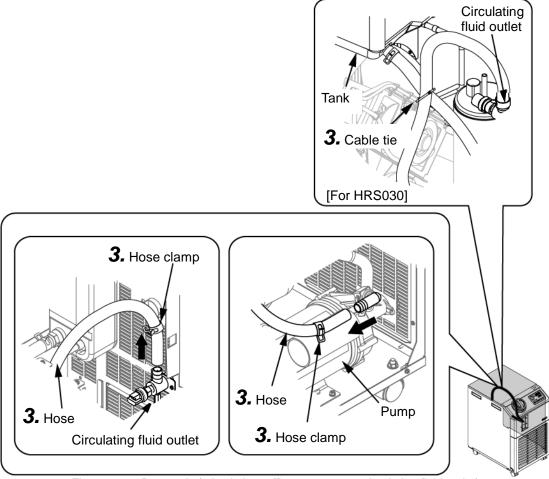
Removal of plastic hose (Between pump- circulating fluid outlet)
